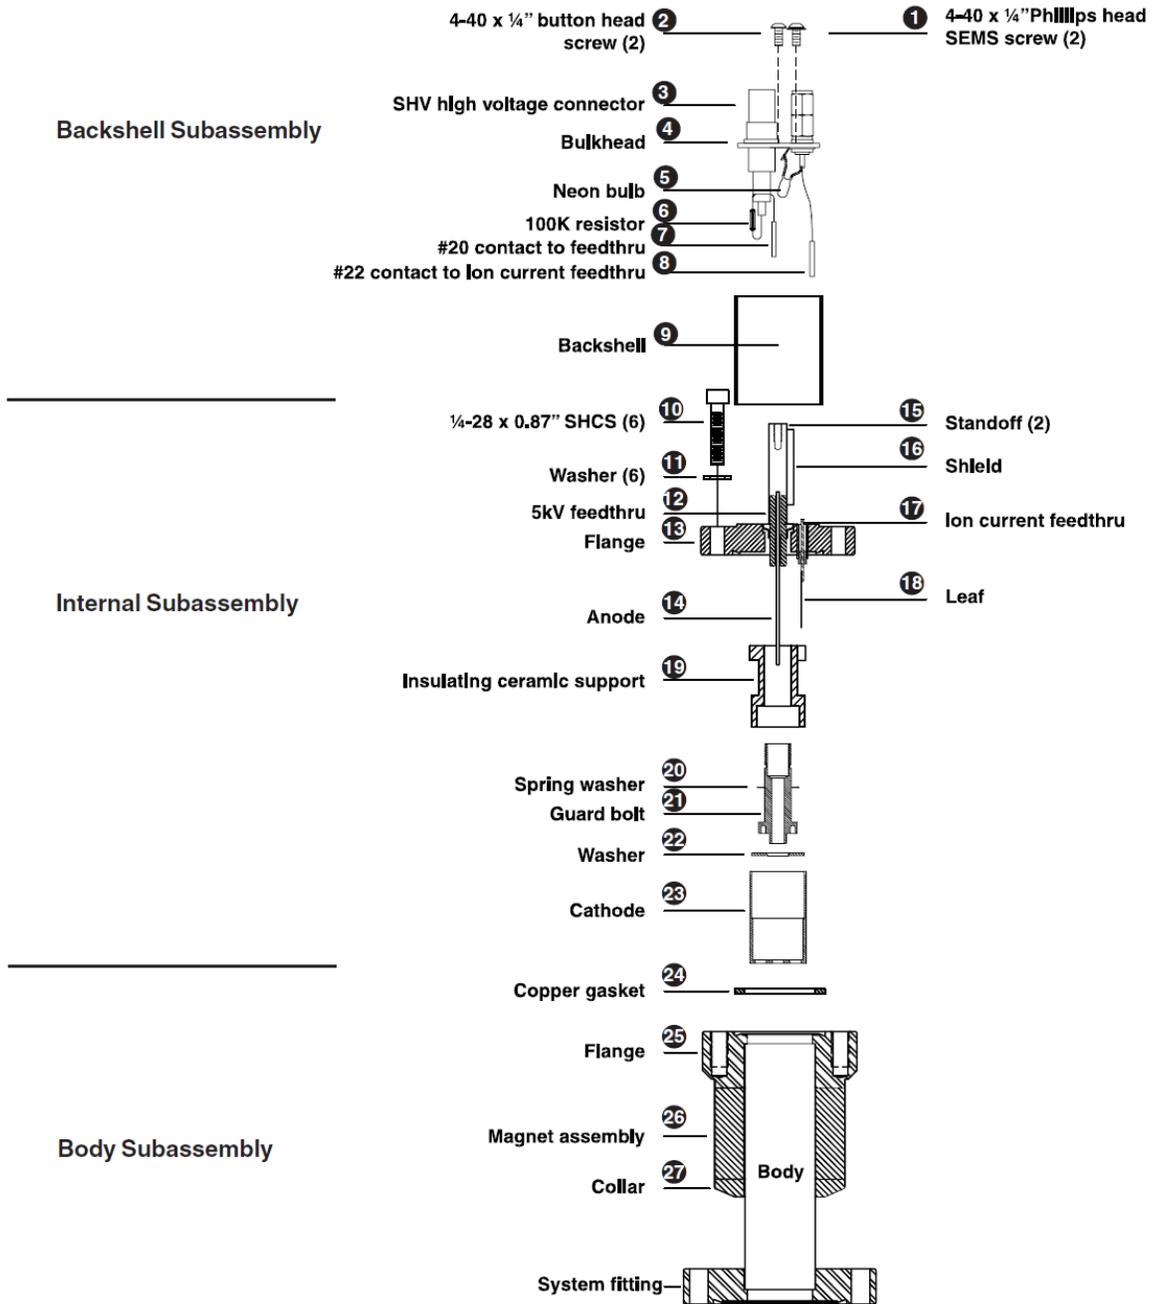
Exploded View of the 431/422 Cold Cathode Gauge Assembly
